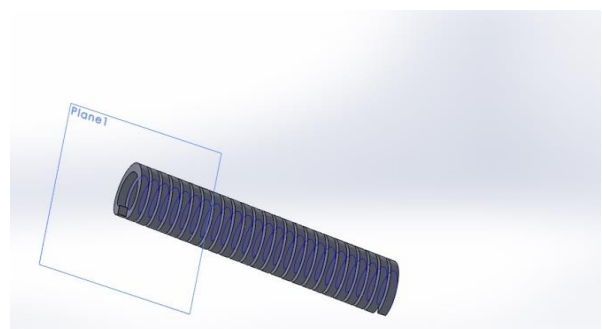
3D model of square coil heat exchanger with PCD 50 mm and tube diameter 10 mm
